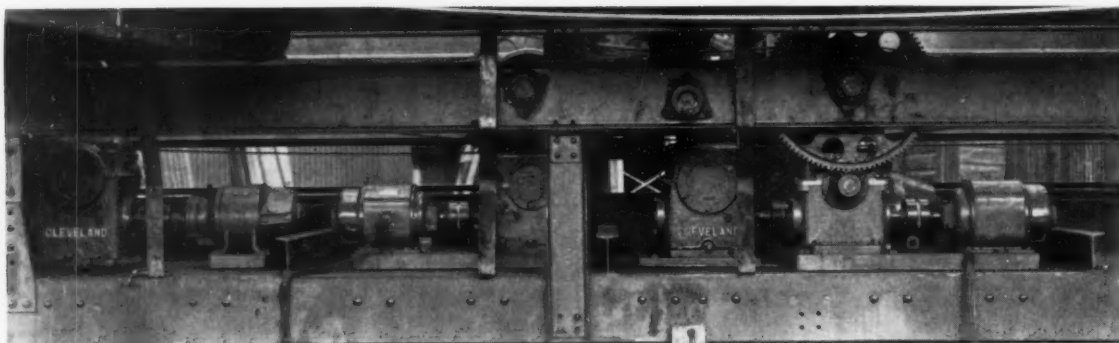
MOTORS AND REDUCING GEARS FOR ELEVATING AND LOWERING OBSERVING BRIDGE, OPERATING WIND CURTAINS, AND OPENING AND CLOSING SHUTTERS
